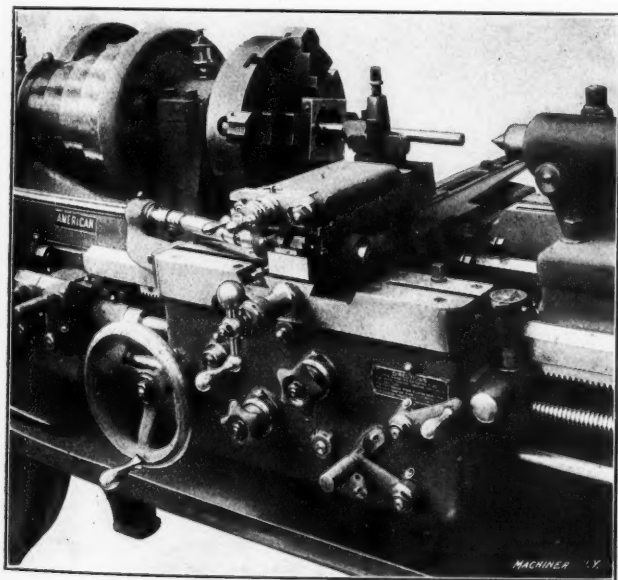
Relieving Attachment of American Tool-room Lathe being used for Internal Work
